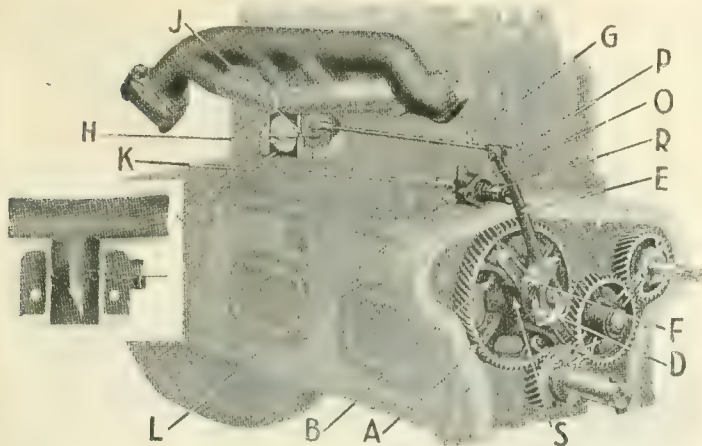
Governor adjustments on the Waukesha engine and timing gears
